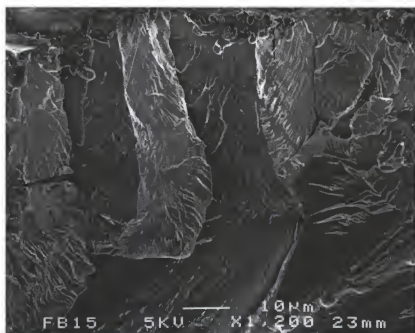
A SEM fractograph showing the presence of facets of the size of EDM cracks on the fracture surface.
